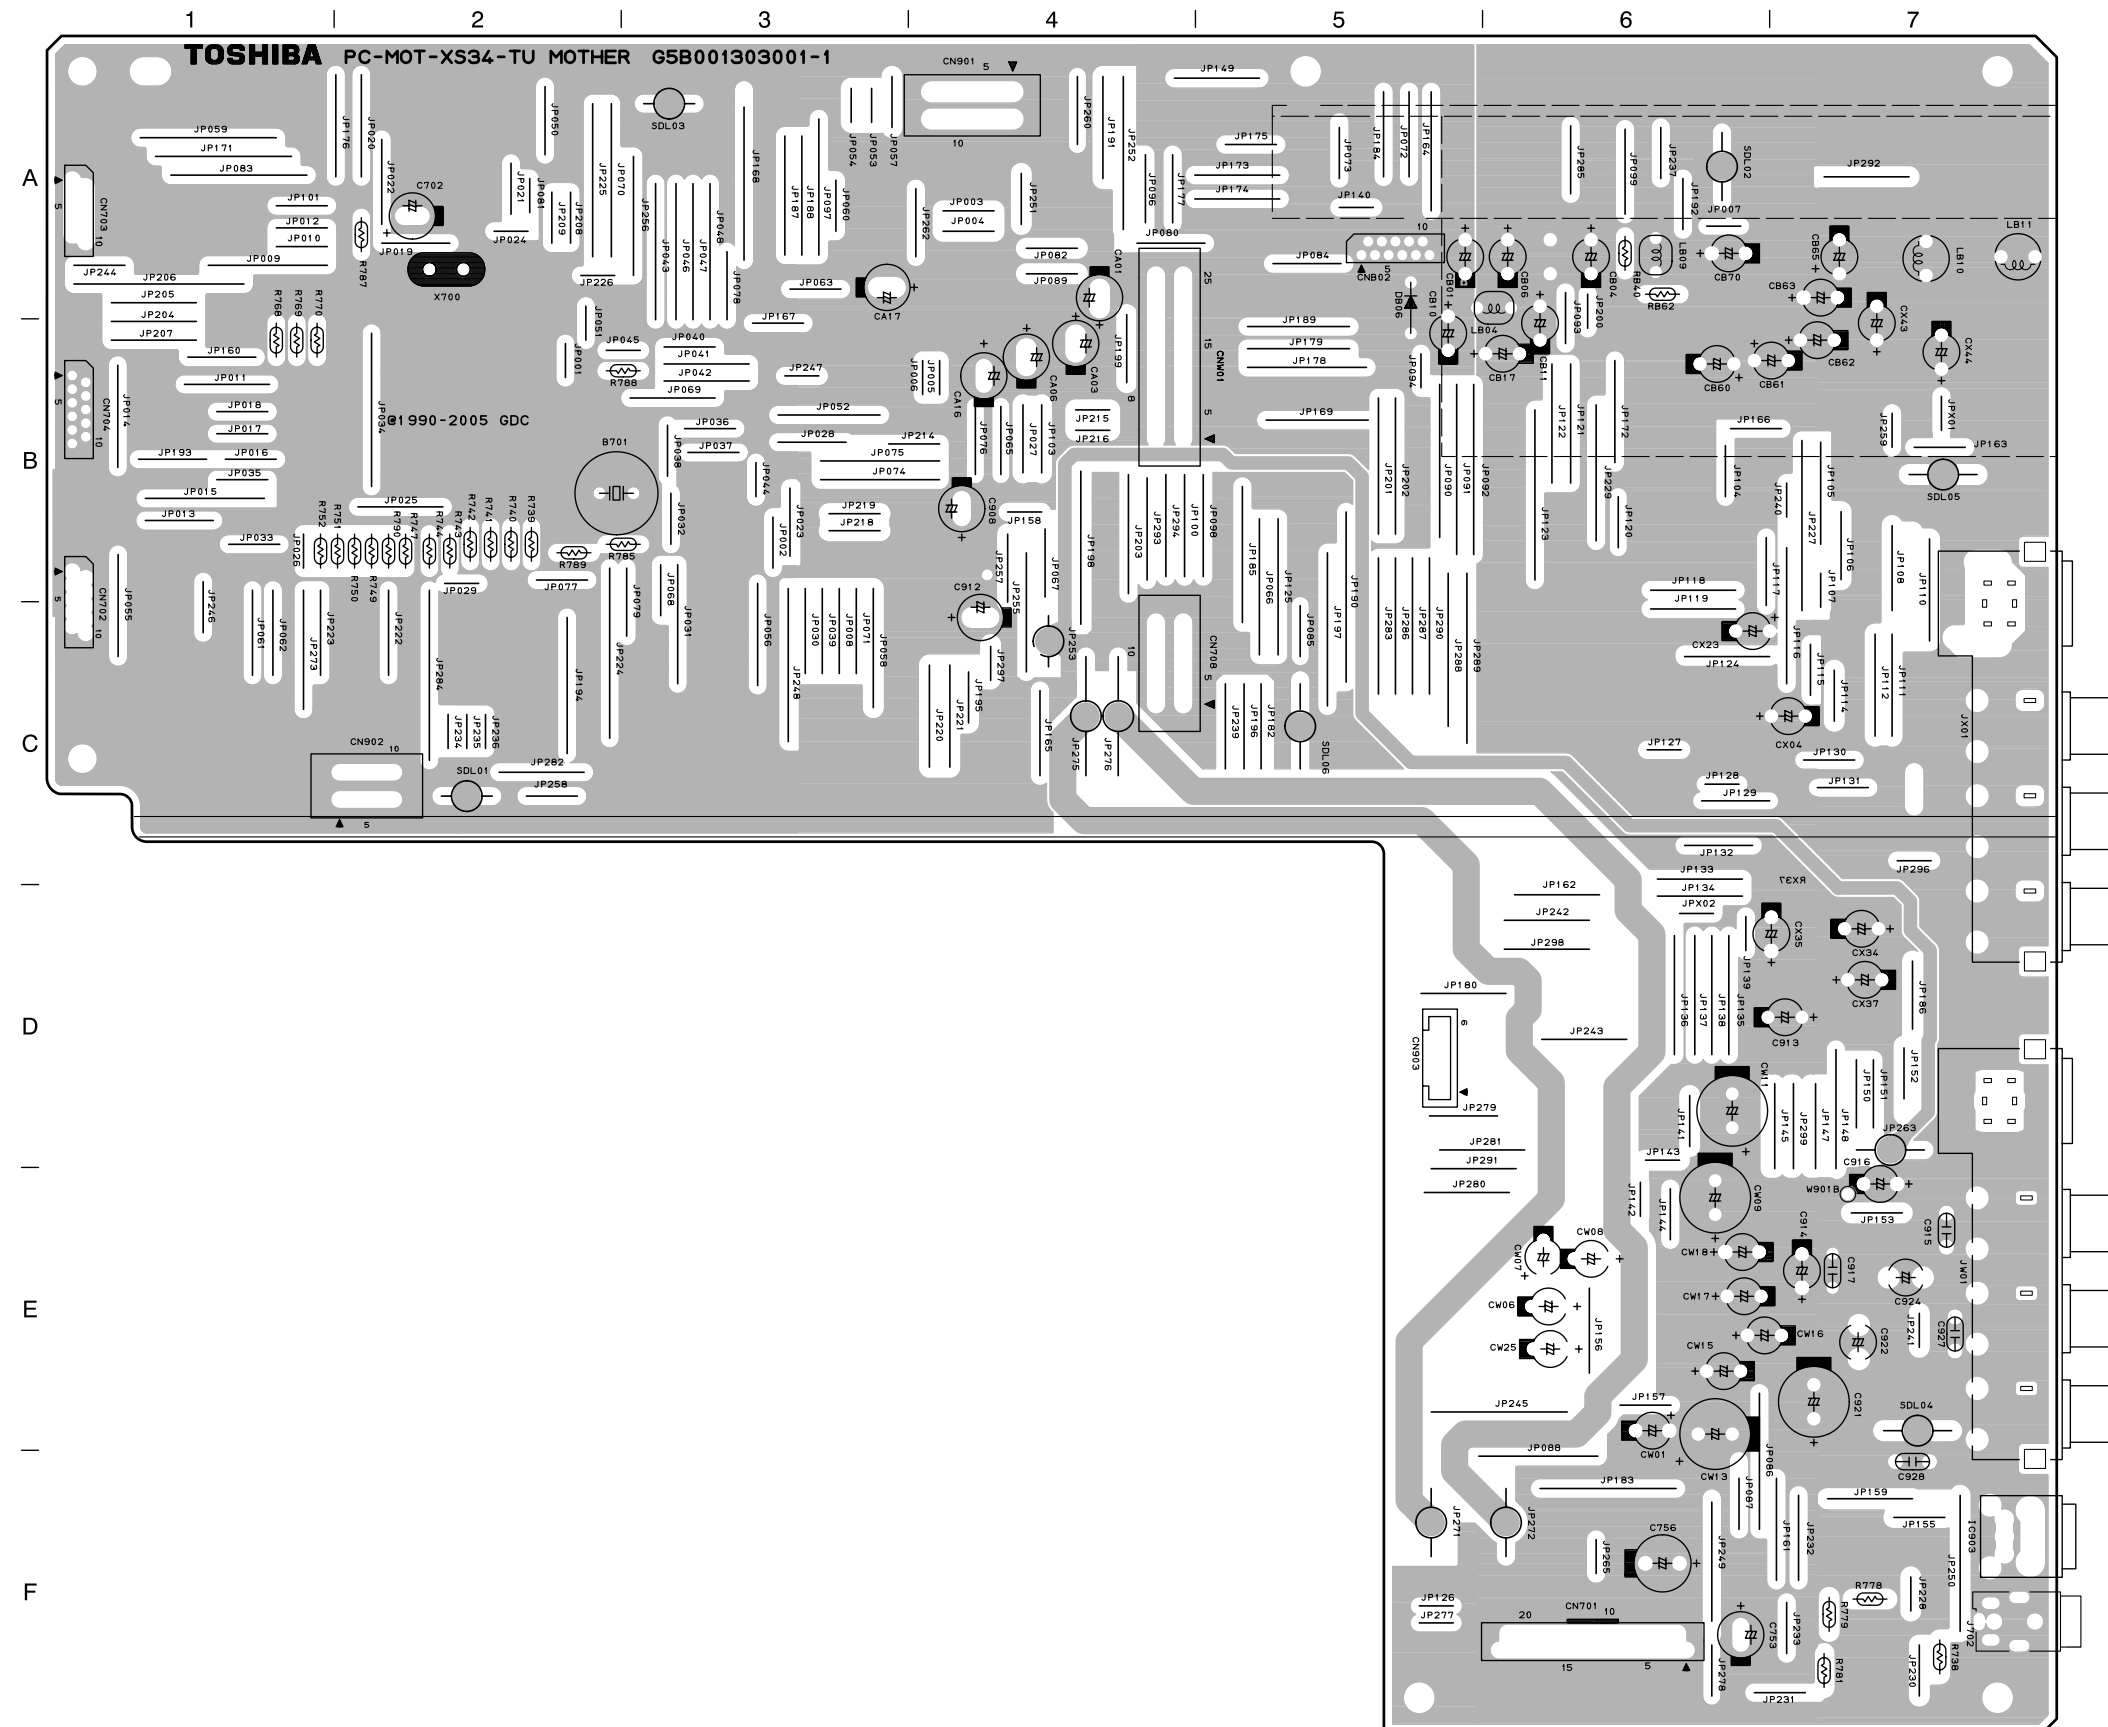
EU05 Mother PC Board (Top side)
